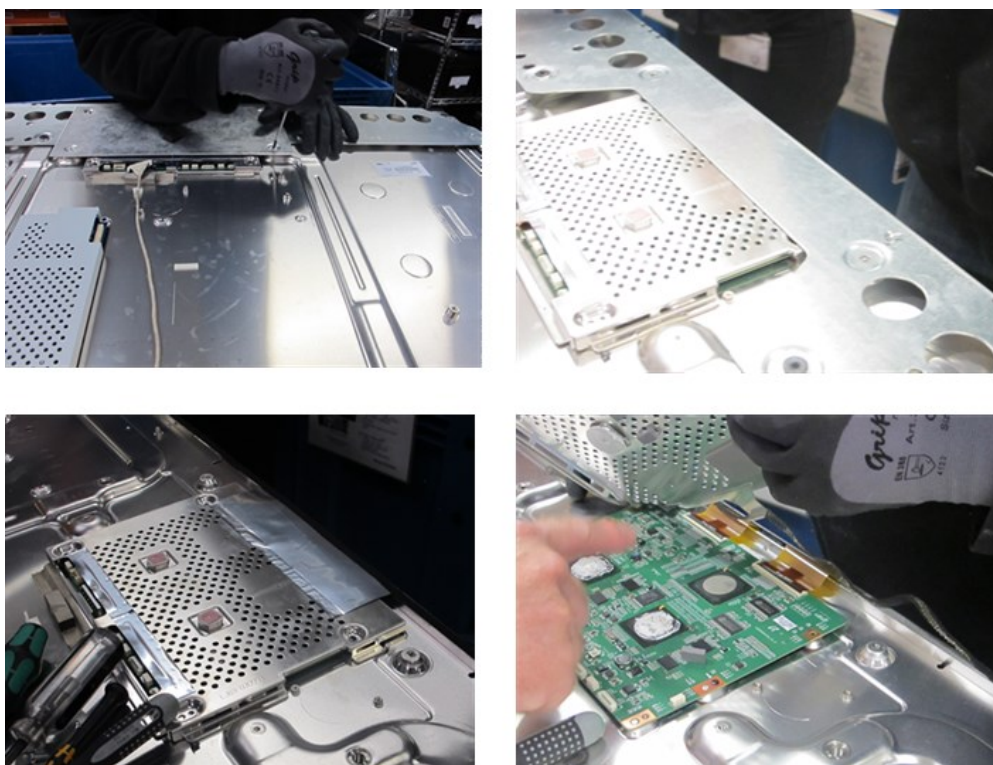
picture of aluminium parts assembled using steel screws
